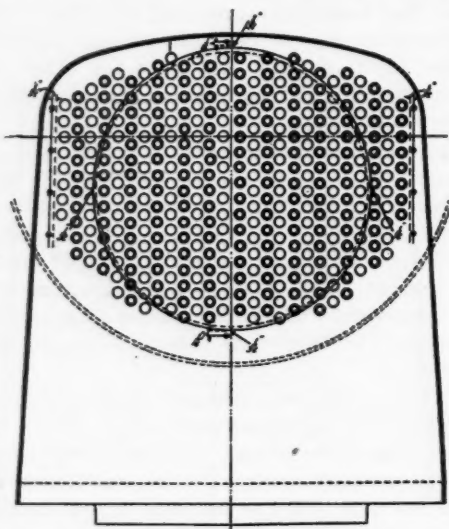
Expansion of Tube Sheet Due to Prossering.
